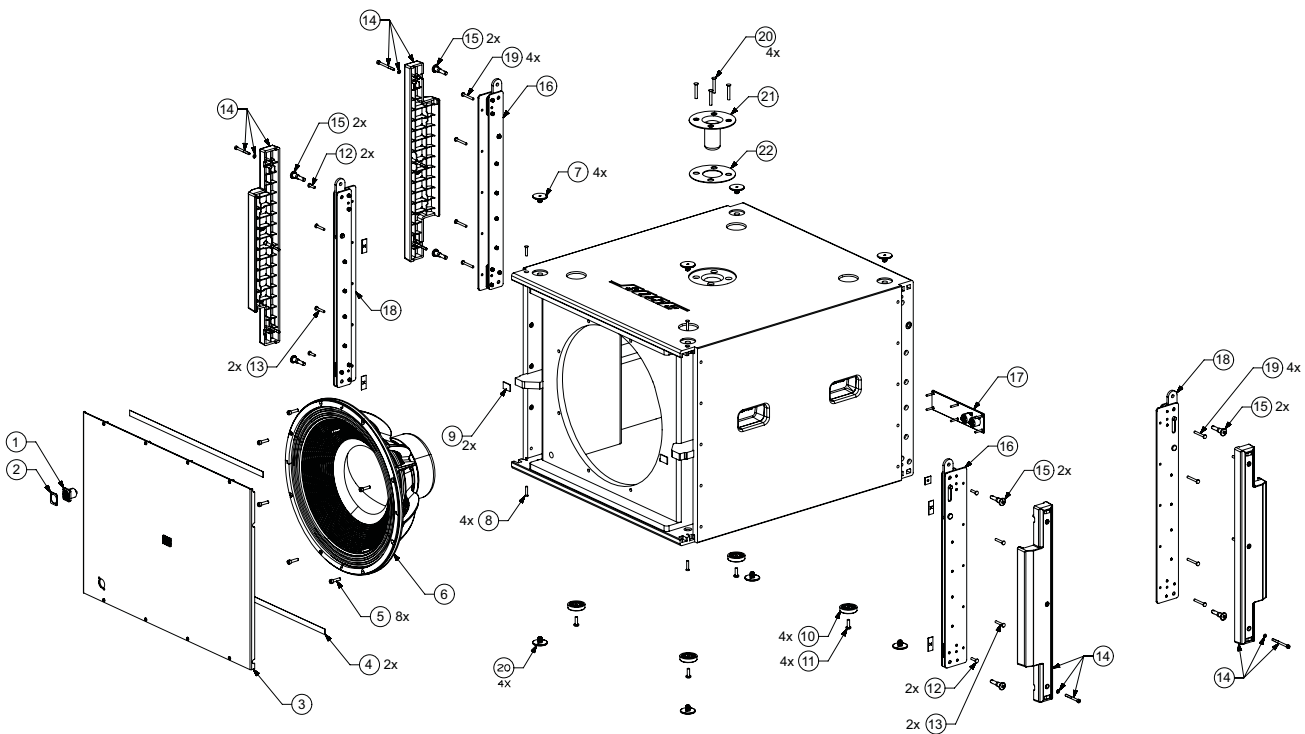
ShowMatch™ SMS118 Subwoofer Exploded View
